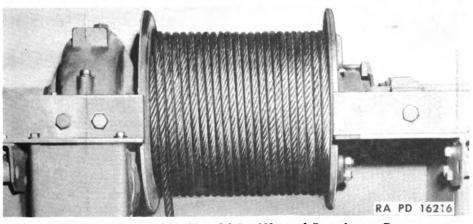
Winch Sliding Jaw Clutch Lever and Drum Flange Lock
